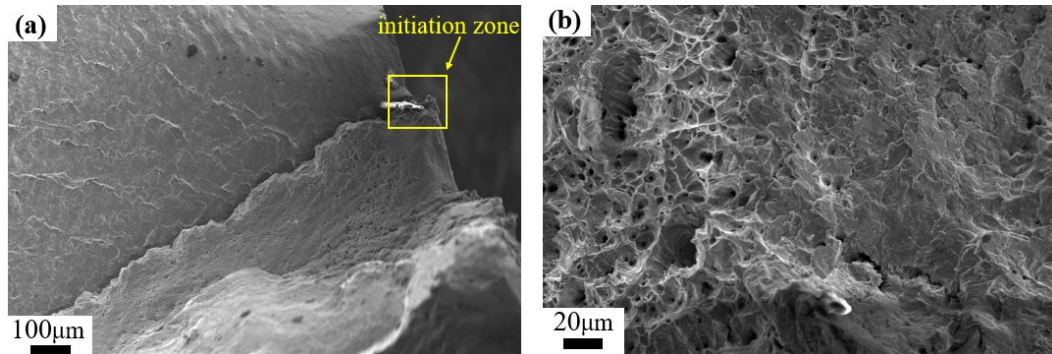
The fatigue fracture surface of condition H 316L sample broken in 81.973 cycles, at 95% of σ_{yield} (a) crack initiation zone, (b) Final rupture zone.
